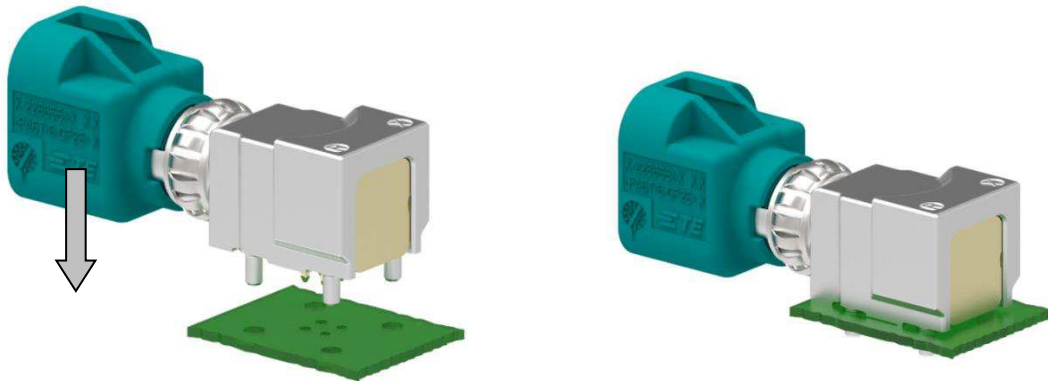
/ Bild 3: HSD Header 90° with shielding TE-No. 2286797
